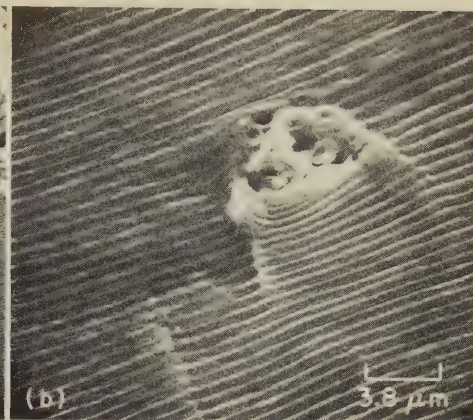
Stage II of a fatigue fracture in a fine-grained specimen of aluminum alloy 2024-T3 tested in dry air
